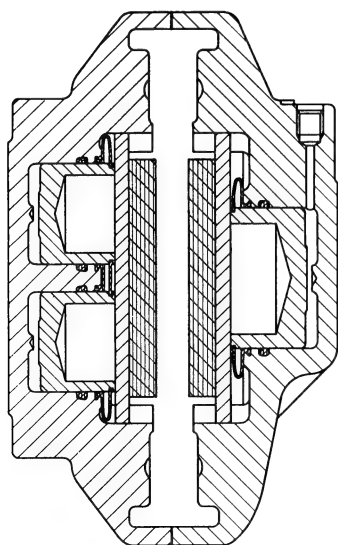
Front caliper - Sectional view across pistons, lining pads and backing plates.
